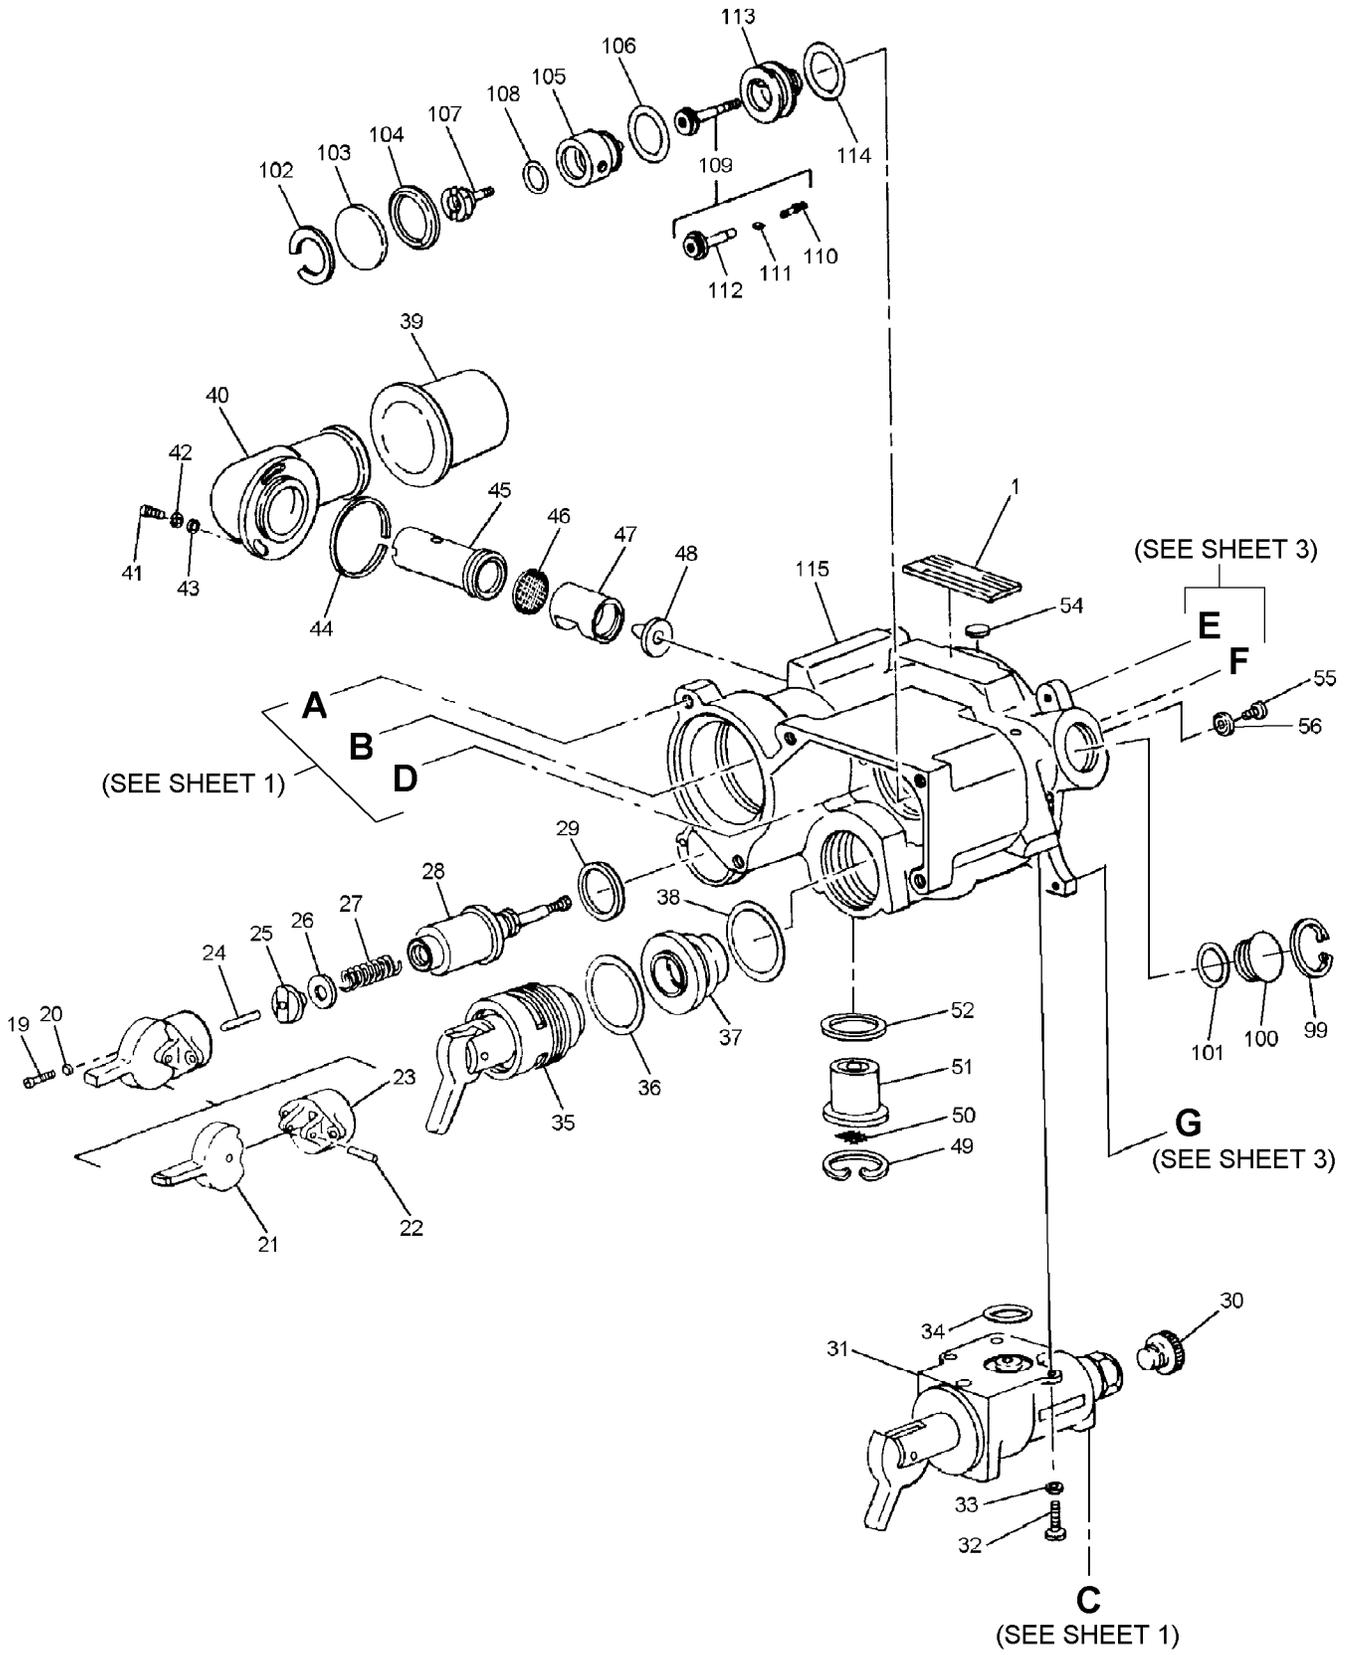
29255 Panel Mounted Oxygen Regulators (Sheet 2 of 3)
